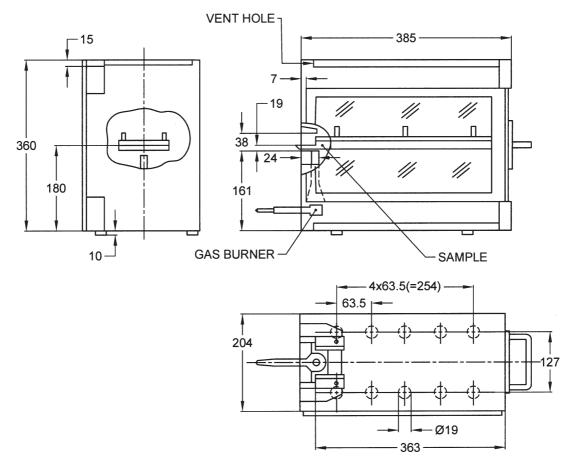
Example of Combustion Chamber with Sample Holder and Drip Pan
